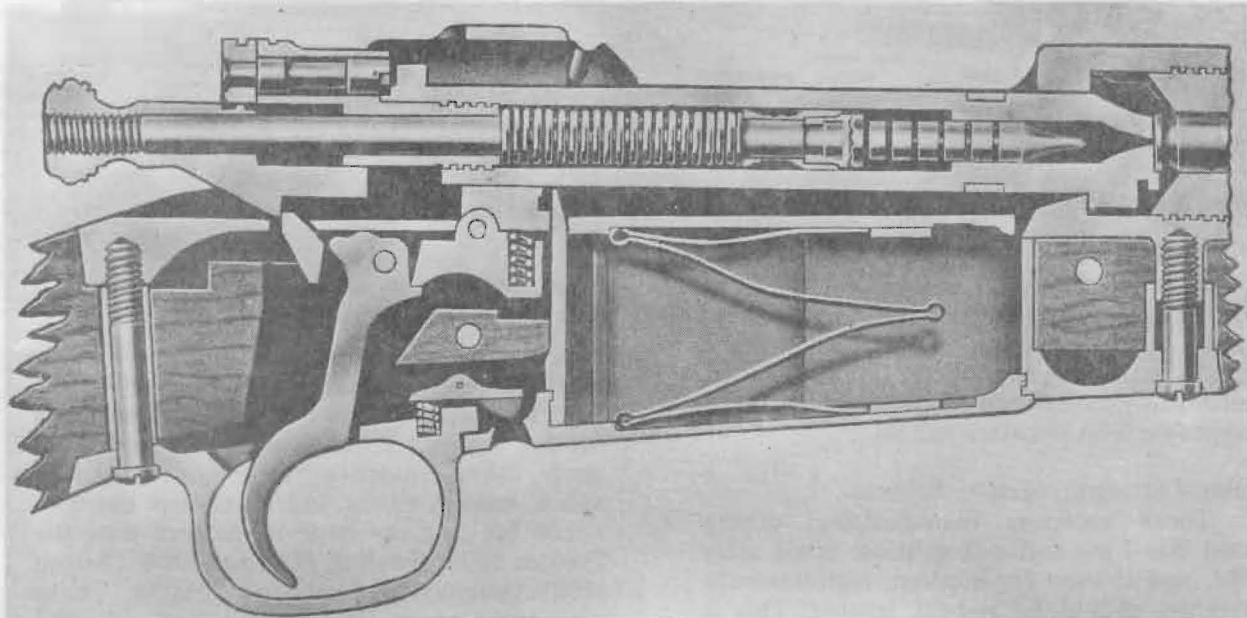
Springfield Model 1903. Cutaway drawing shows the rifle loaded, cocked, and ready to fire with the magazine empty. Note the positioning of the trigger, sears, and spring components. The two-piece striker assembly, held together by the firing pin sleeve, is clearly indicated.
